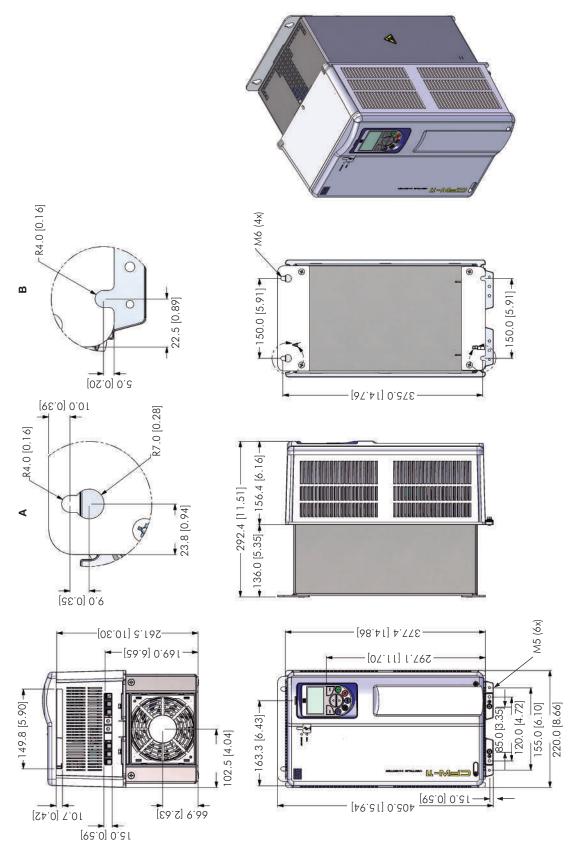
Inverter dimensions - frame size B - mm [in]
